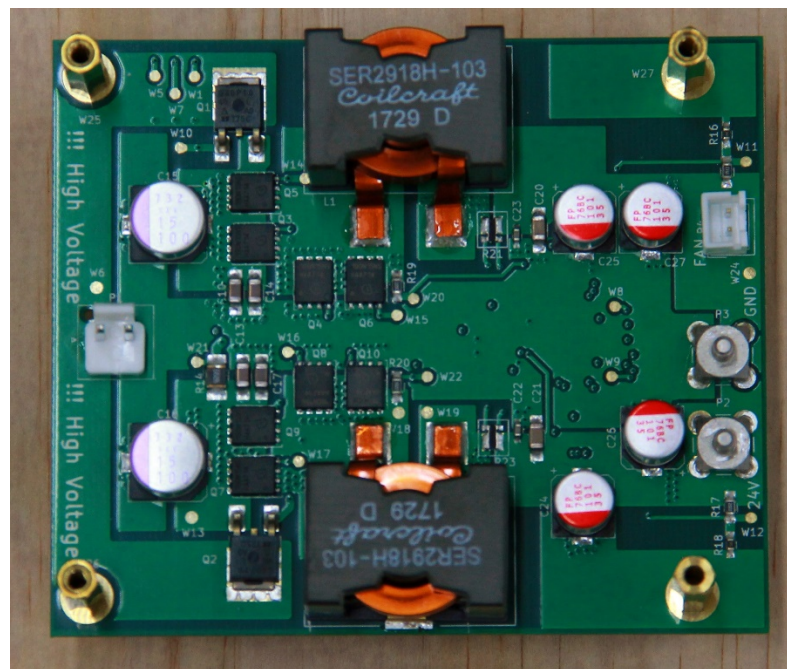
The photograph of the DC-DC converter’s printed circuit board.
